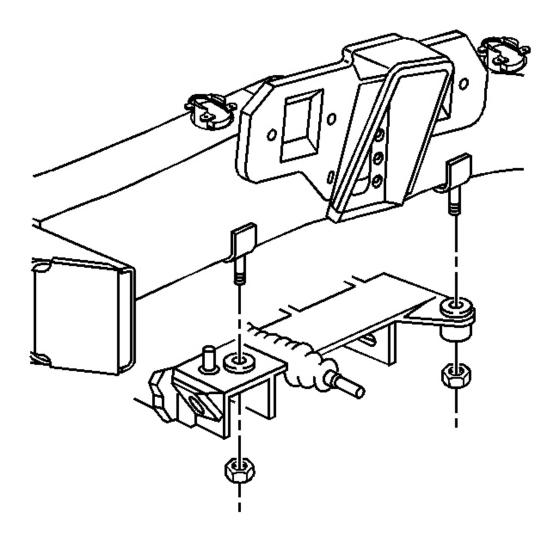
View of Crossmember Nut & Bolt - Front Courtesy of GENERAL MOTORS CORP.
